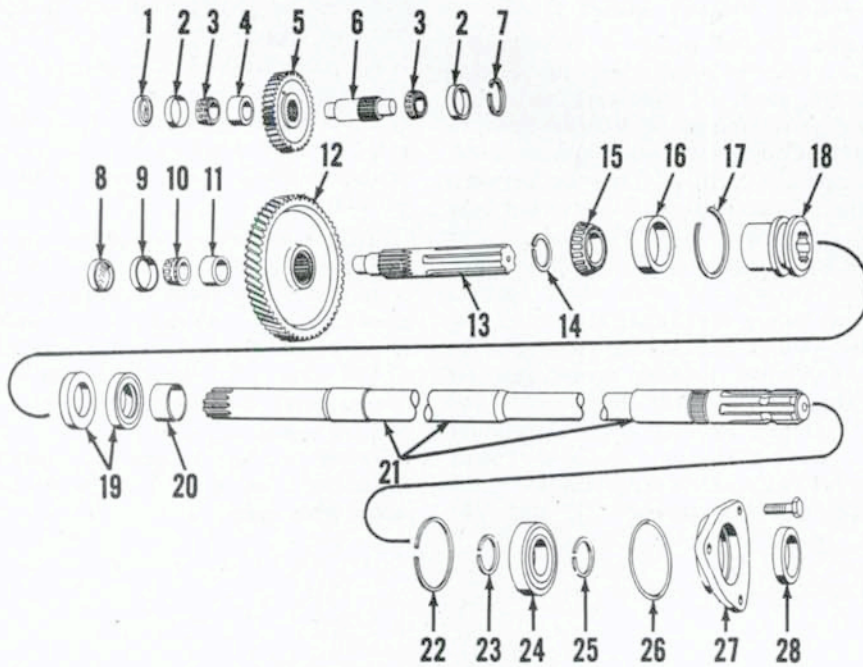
Exploded view of the Power Take-Off assembly. Adjustment of bearings (10 and 15) is controlled by the thickness of snap ring (17); the adjustment of bearings (3) is controlled by thickness of snap ring (7).
